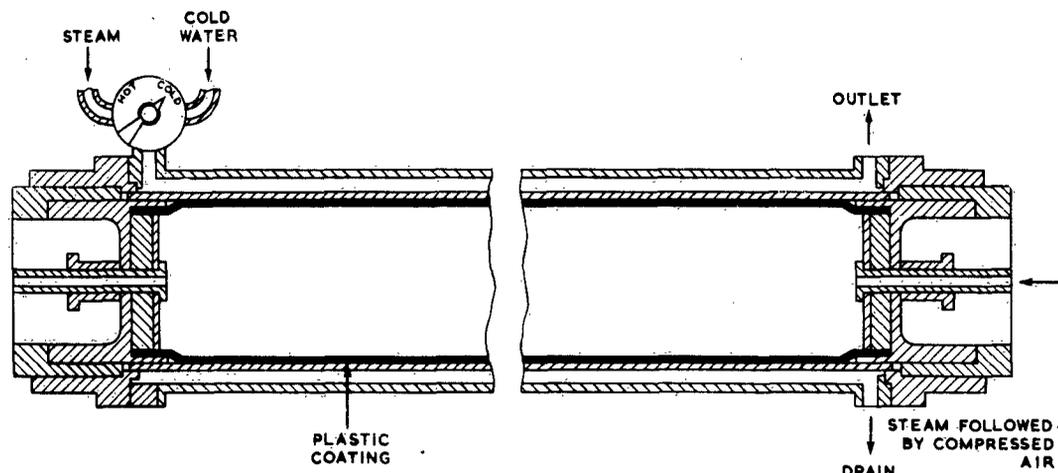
Plastic coating expansion mould used in the stress relief technique
